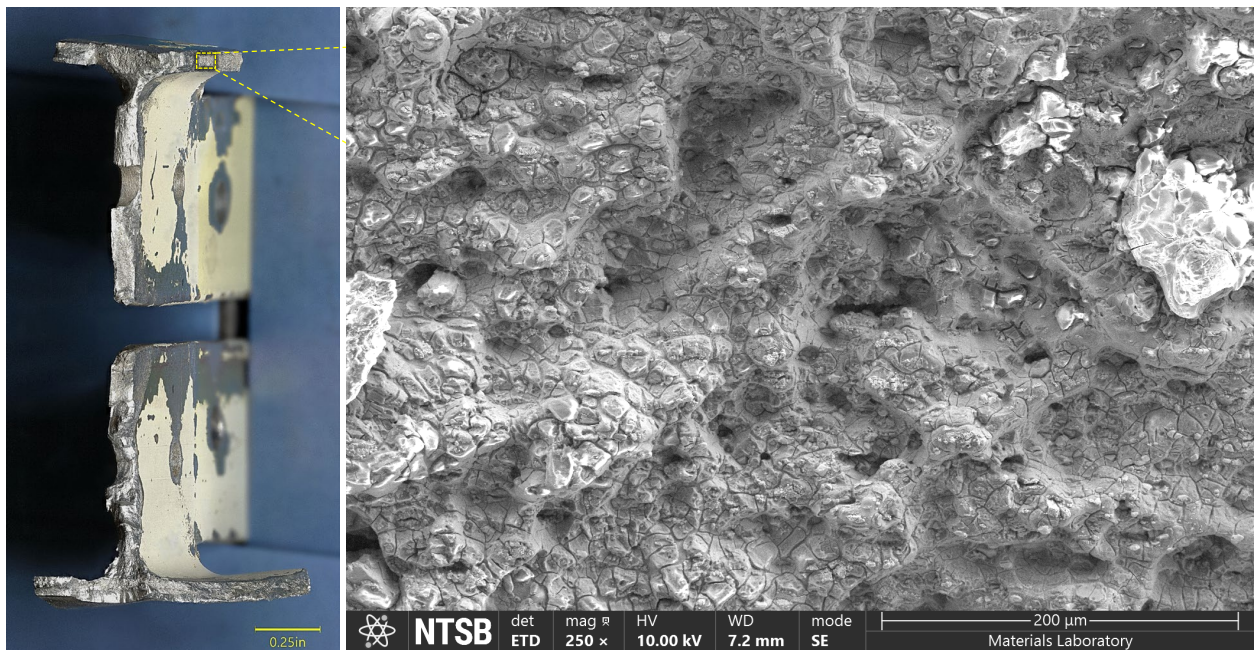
Secondary electron fractograph of the forward flange fracture surface of the upper main spar cap (outboard fracture location) showing an oxide layer (mudcracked appearance) over a dimpled subsurface, consistent with overstress fracture.
